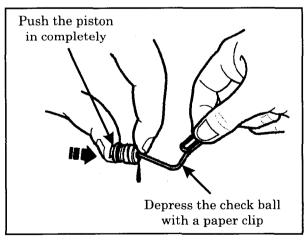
While holding the Hydraulic Lash Adjuster, push the piston in completely and depress the check ball with a paper clip.
